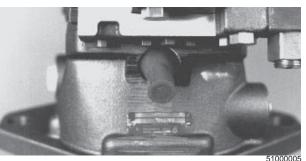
Minimum Displacement Limiter with Tamper Resistant Cap (Cartridge Motor Configuration Shown)
